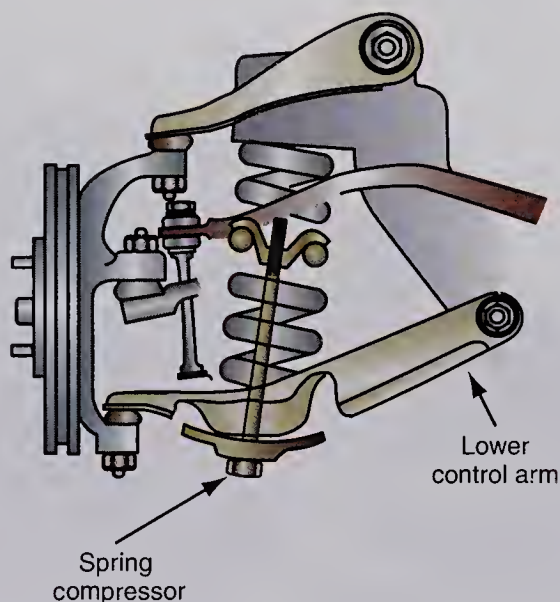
Spring compressing tool installed on a spring in a short-and-long arm suspension system.
